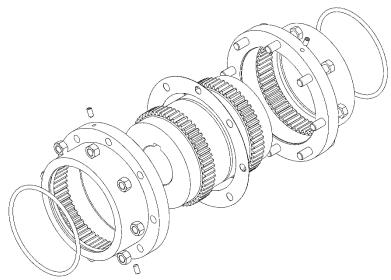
STEEL GEAR DOUBLE FLEX COUPLING (ISO)
